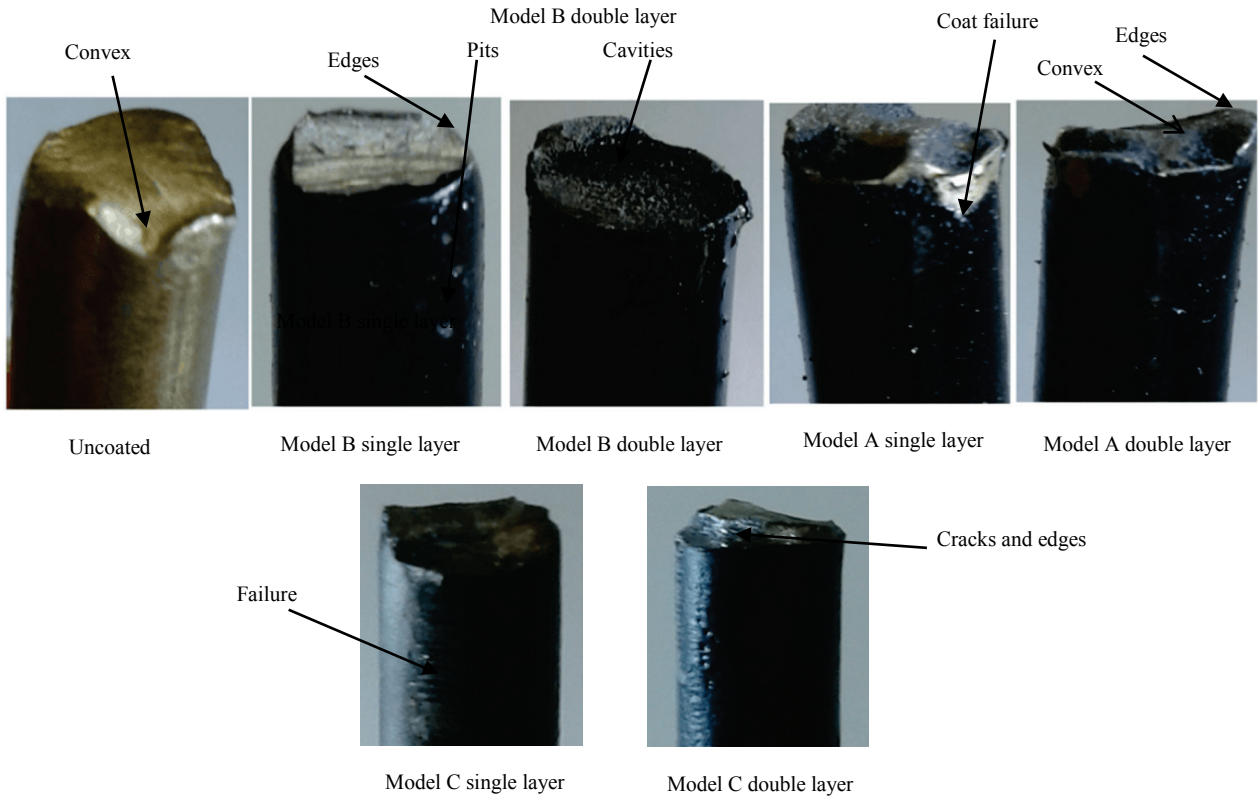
Fracture surface of specimens after test in south Rumaila crude oil.
